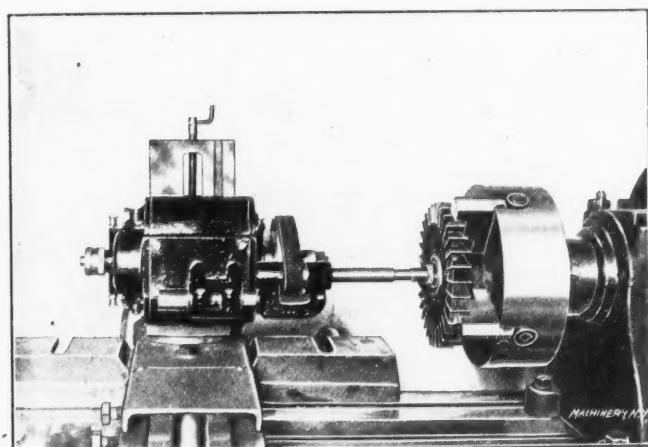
Internal Grinding Attachment. The Spindle runs 14,000 R. P. M.
